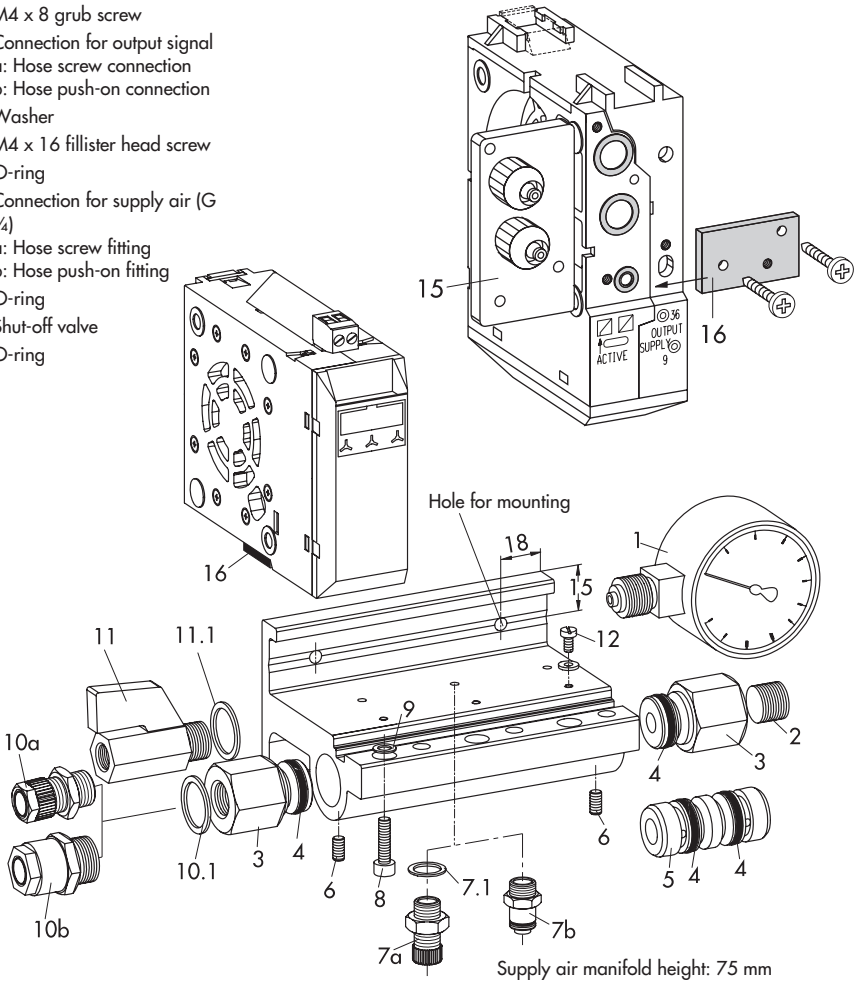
· Exchanging the connecting plate in the converter (top) · Assembling the supply air manifold (below)
